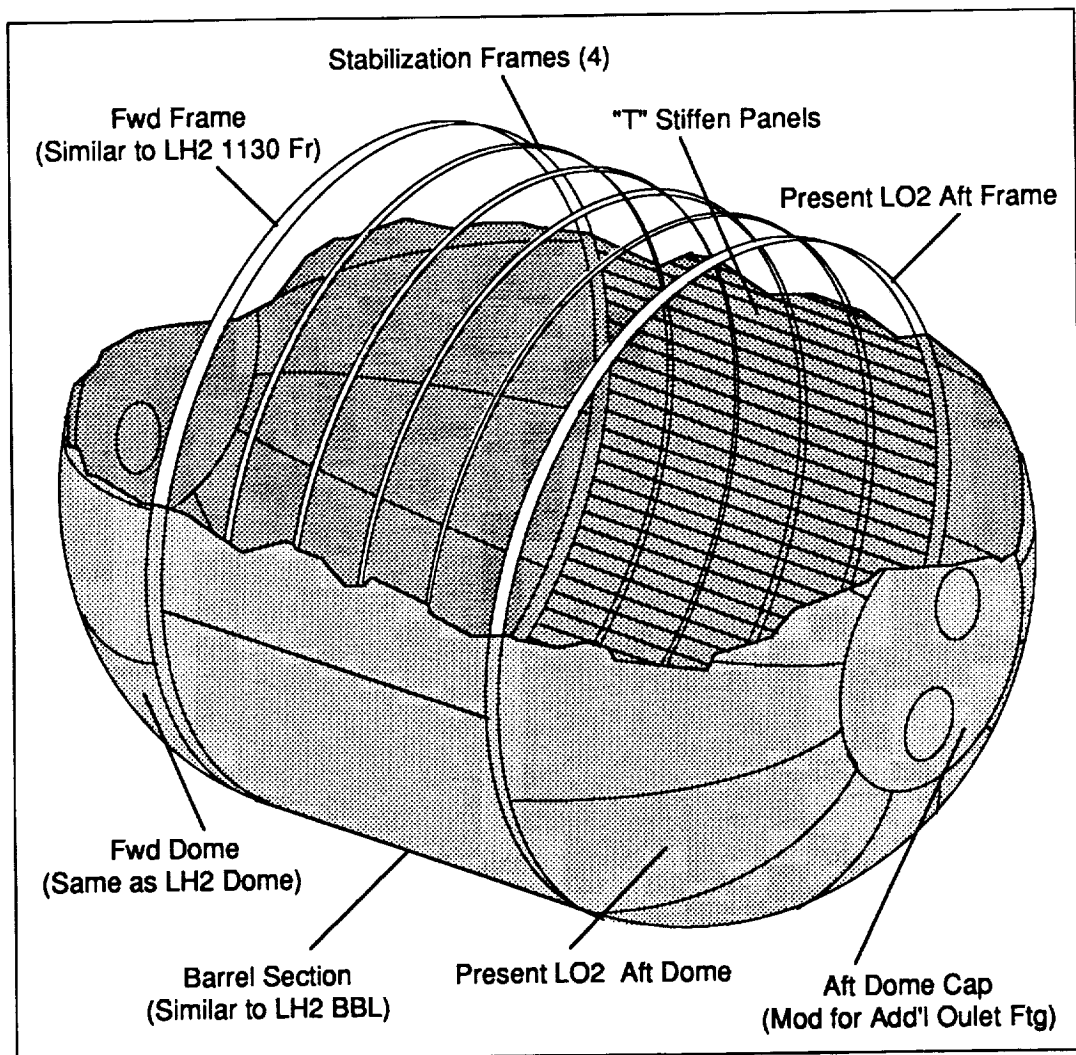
Cutaway View of LO2 Tank
